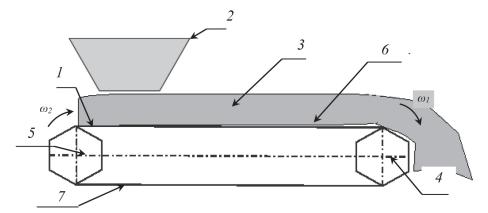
Diagram of loading a multi-motor plate conveyor with ore
